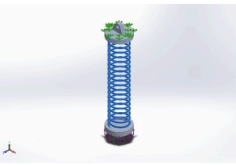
3D CAD model of the in-pipe inspection robot showing spring-based radial expansion mechanism.
